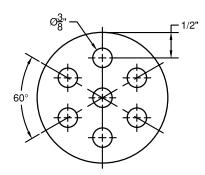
Hole pattern template with dimensions for large tire centers.
